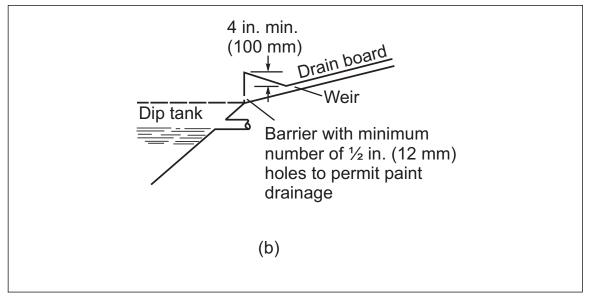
Arrangement of drainboards to prevent sprinkler discharge from entering dip tank
